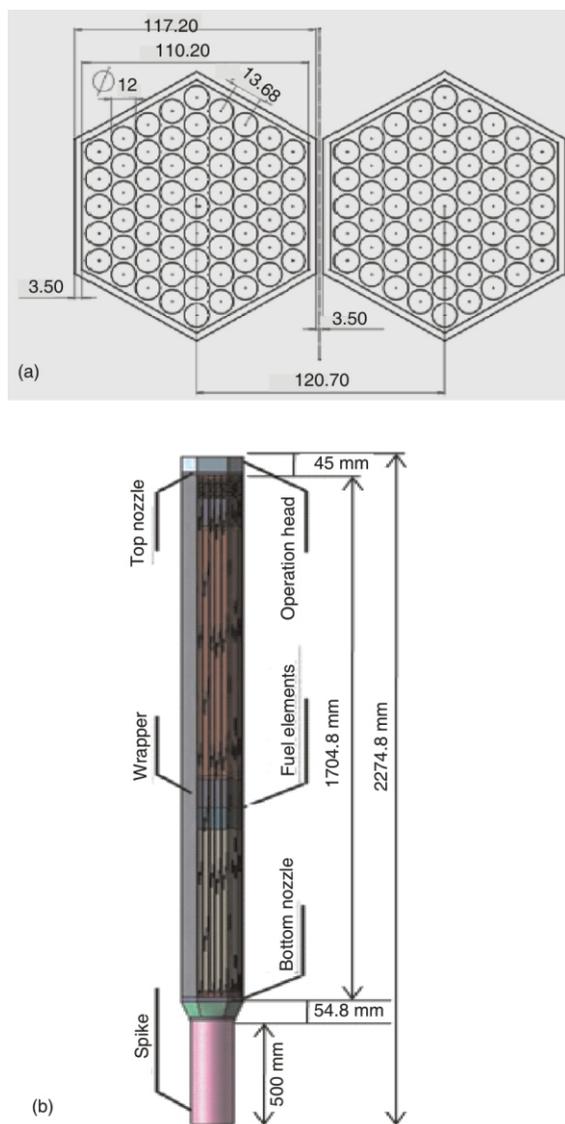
Schematic views of CLEAR-I fuel assembly (a) plane view, (b) top view
